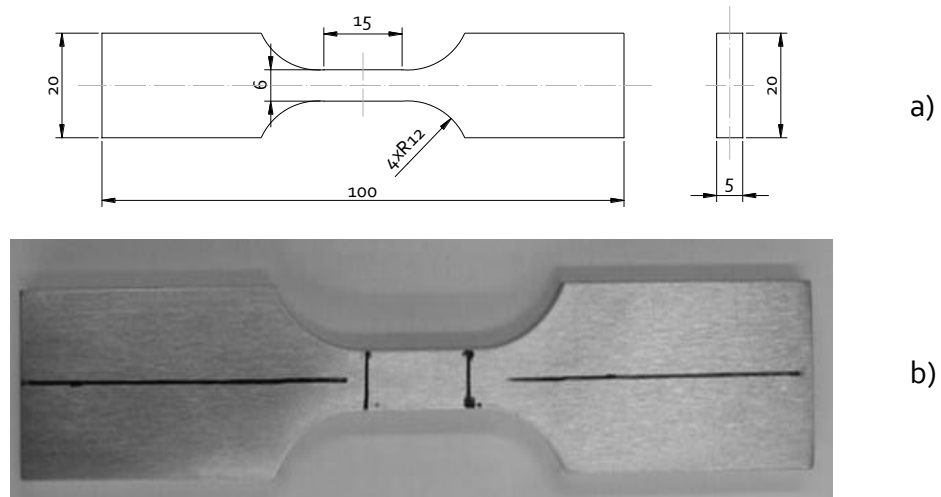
Smooth plane fatigue specimen (S355 steel): a) dimension in mm; b) photo of a smooth plane specimen.
